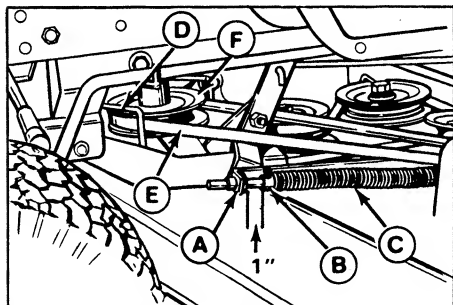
Mower Drive Belt Tension Adjustment - 42" & 48"
